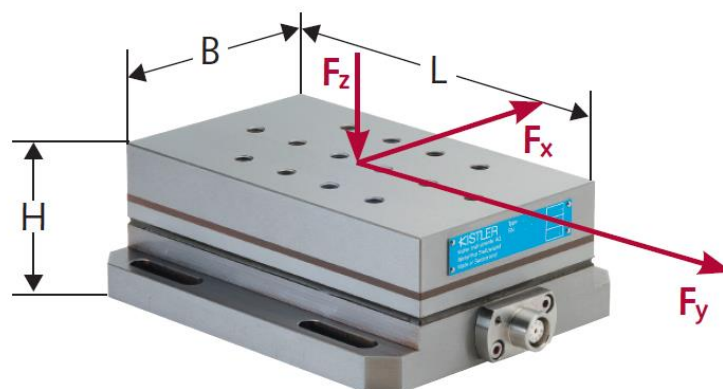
Lathe tool dynamometer type 9257B (Kistler)
